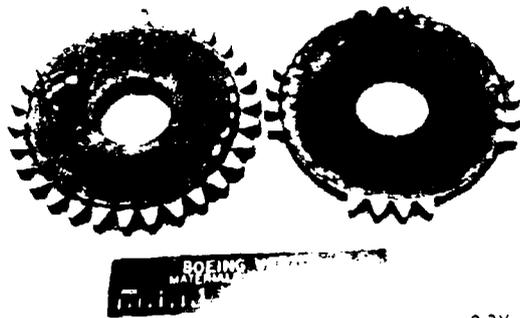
Rotating fatigue test gear (left) and single-tooth fatigue test gear (right) vacuum carburized in a lot which was inadvertently exposed to 2,000°F. Center web sections were copper plated, the teeth were not.
